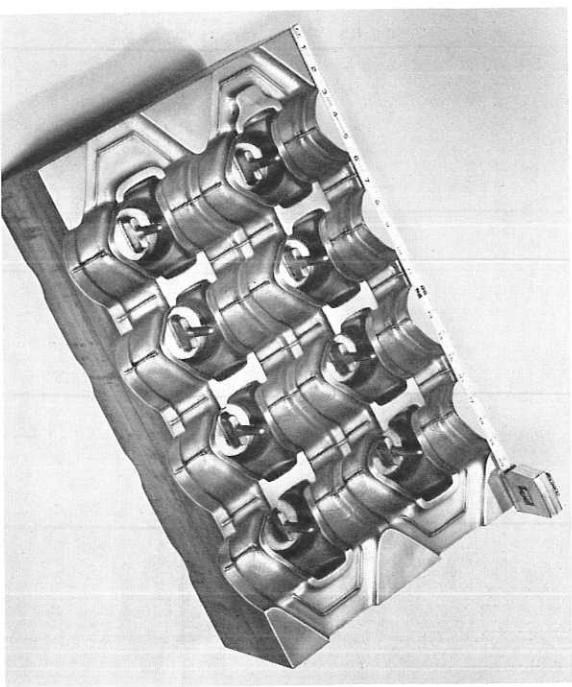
Steel forging die produced by two ECM operations. A 20,000-A machine will produce a part of this size and complexity in 4 hr. (Courtesy of the Anocut Engineering Company.)
